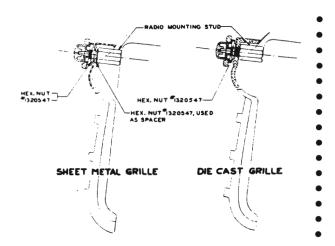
Radio Installation—Sheet Metal Grille—Series 50-70
